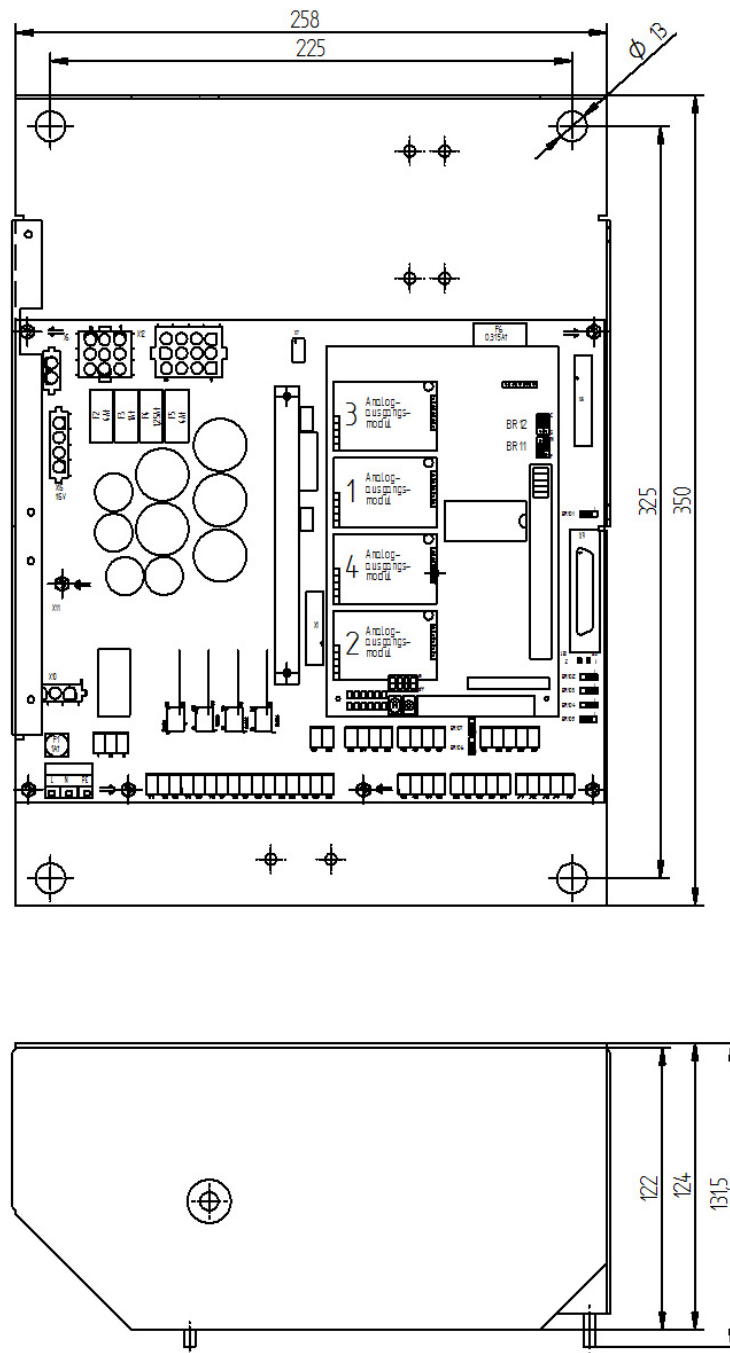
Dimensional drawing LT2 on mounting plate
